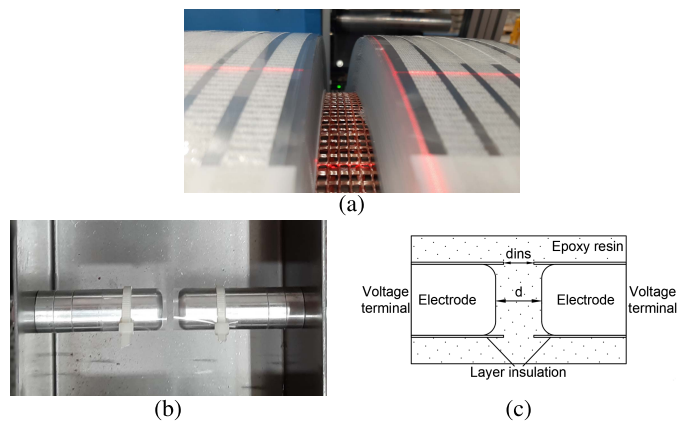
Type-2 sample. (a) Winding with a foil conductor. (b) Sample before casting. (c) Diagram of the sample.
